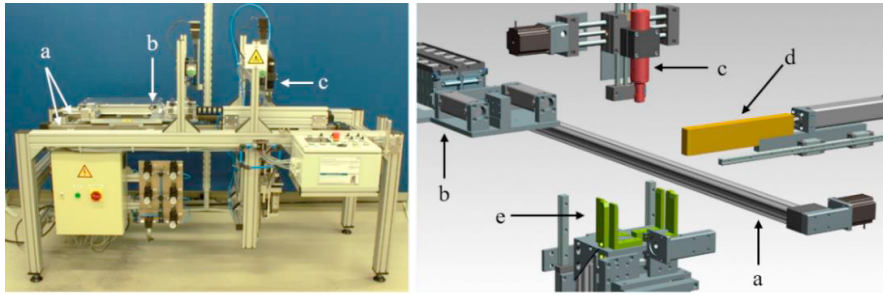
Automated remanufacturing station (left) CAD model of the milling and cell replacement station (right) with a: linear axis b: module clamping c: milling machine d: placeholder e: gripper
